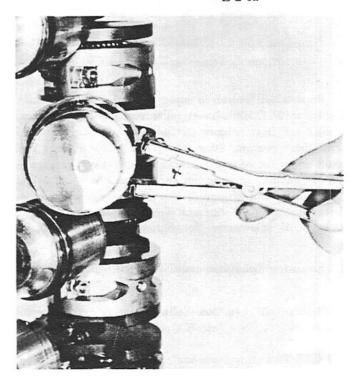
Removing (and Installing) Piston Rings Revised August 1958 Section II - Powerhead
